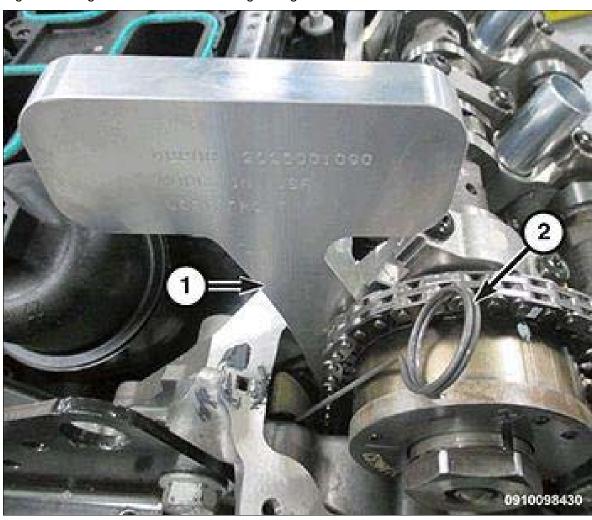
Holding Pawl Off Rack & Pushing Timing Chain Tensioner Holder Into Place
